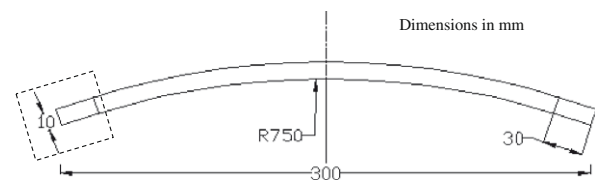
Geometry of molded leaf spring indicating flat end portion for the evaluation of joint strength.
